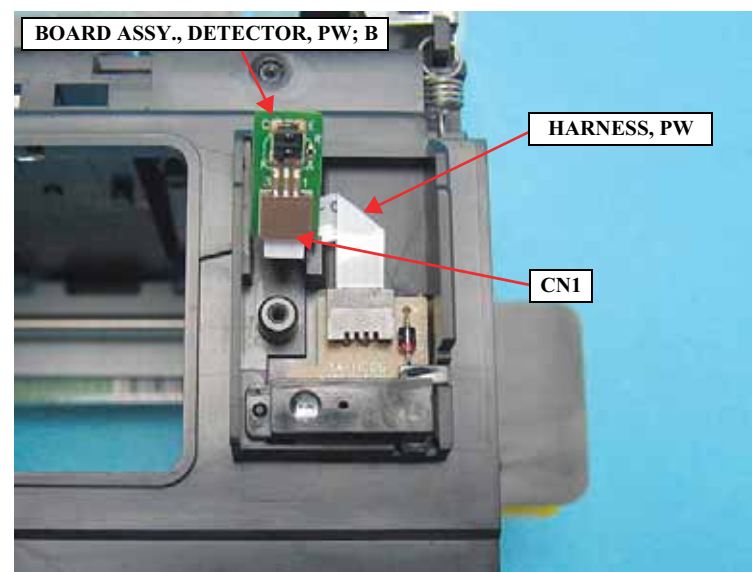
Removing the BOARD ASSY., DETECTOR, PW; B
